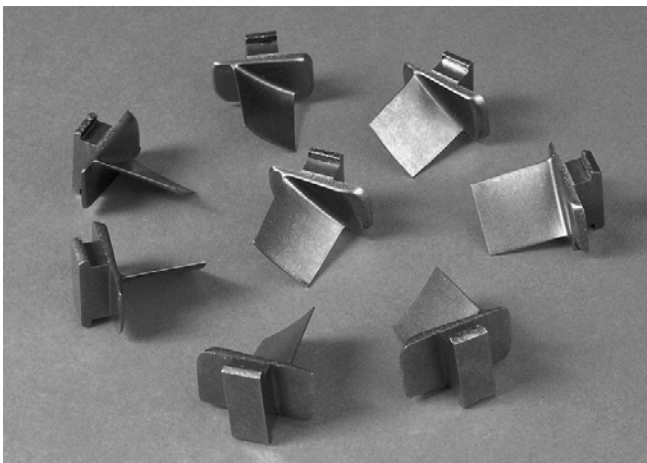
Rotor blades from a gamma titanium aluminide alloy for the high-pressure compressor of a jet engine [5]
